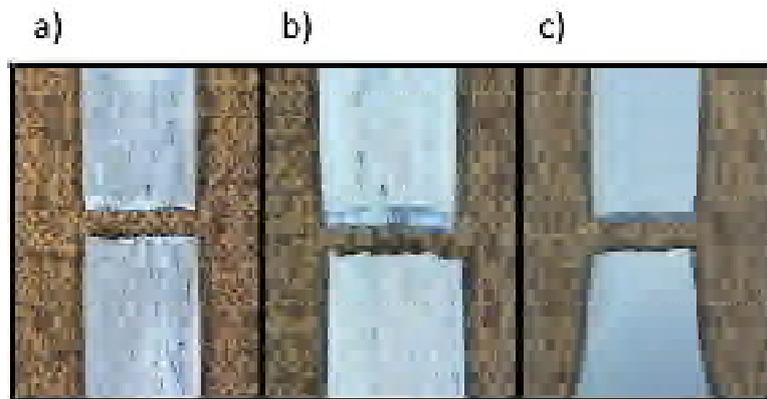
fracture appearance a) AZ31 (extruded); b) AZ31 (rolled); c) AW6016
